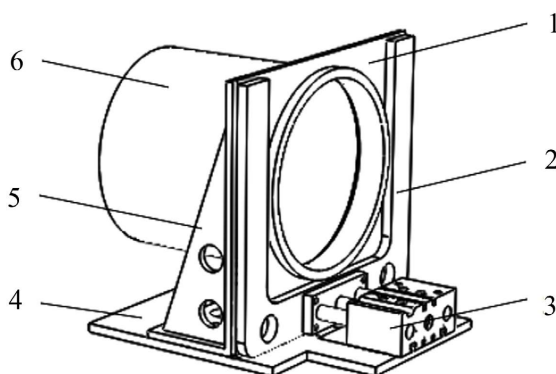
Disassembly of cylinder plane guide rail mechanism
